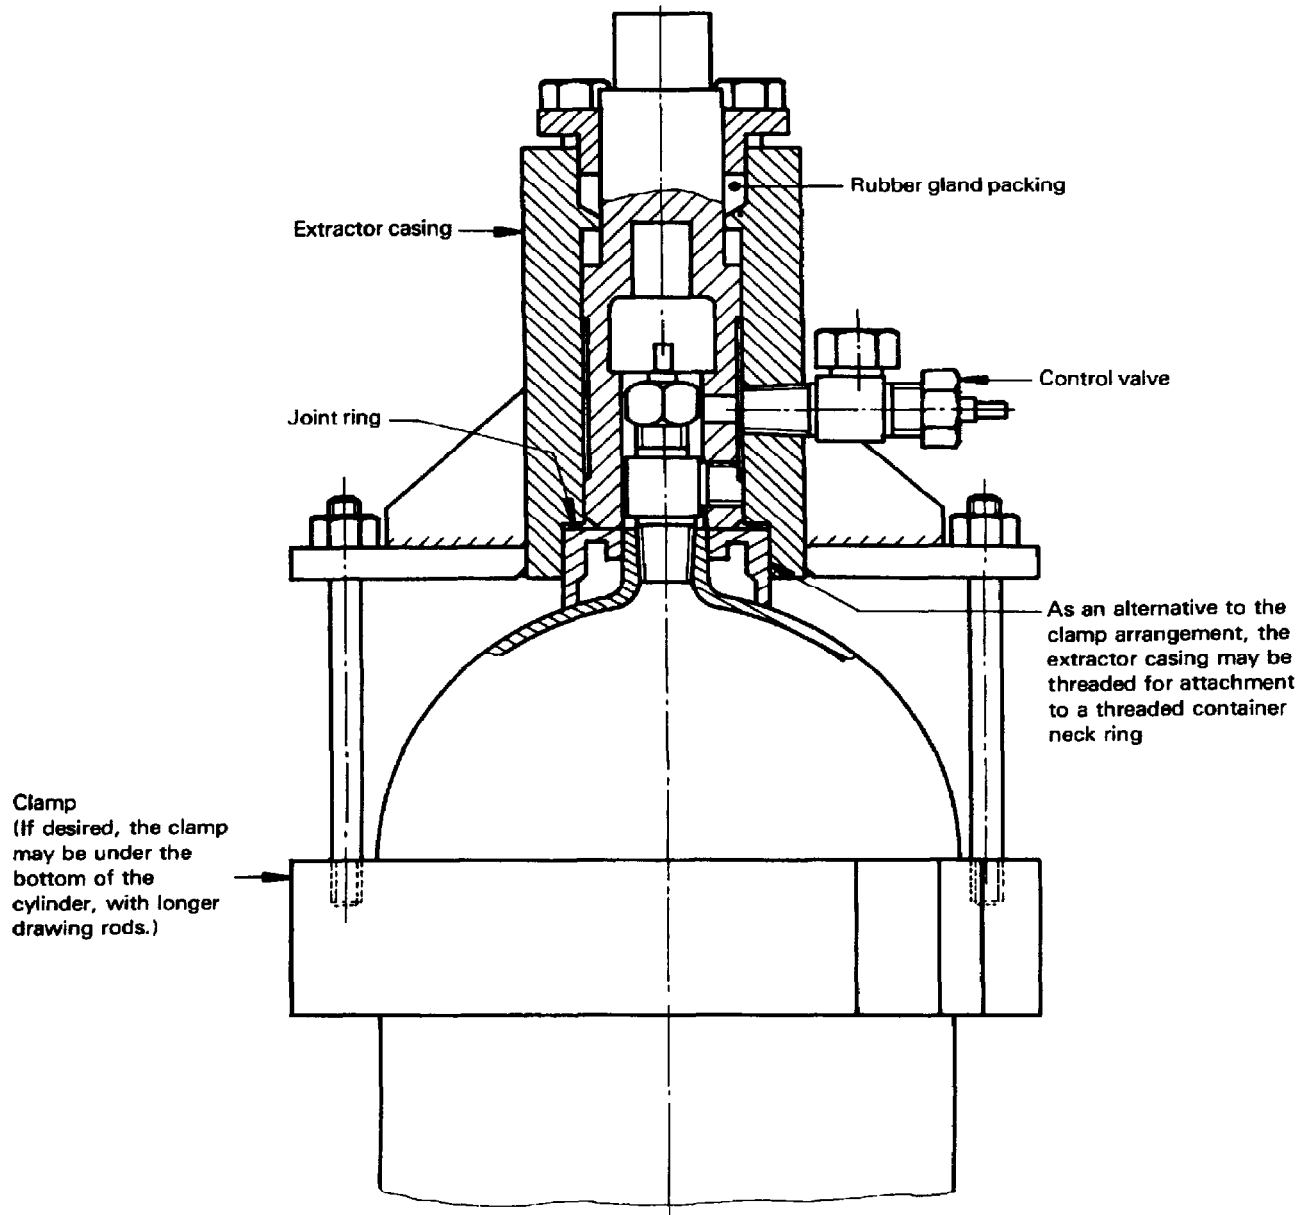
Typical device used for the removal of a damaged/obstructed gas cylinder valve
